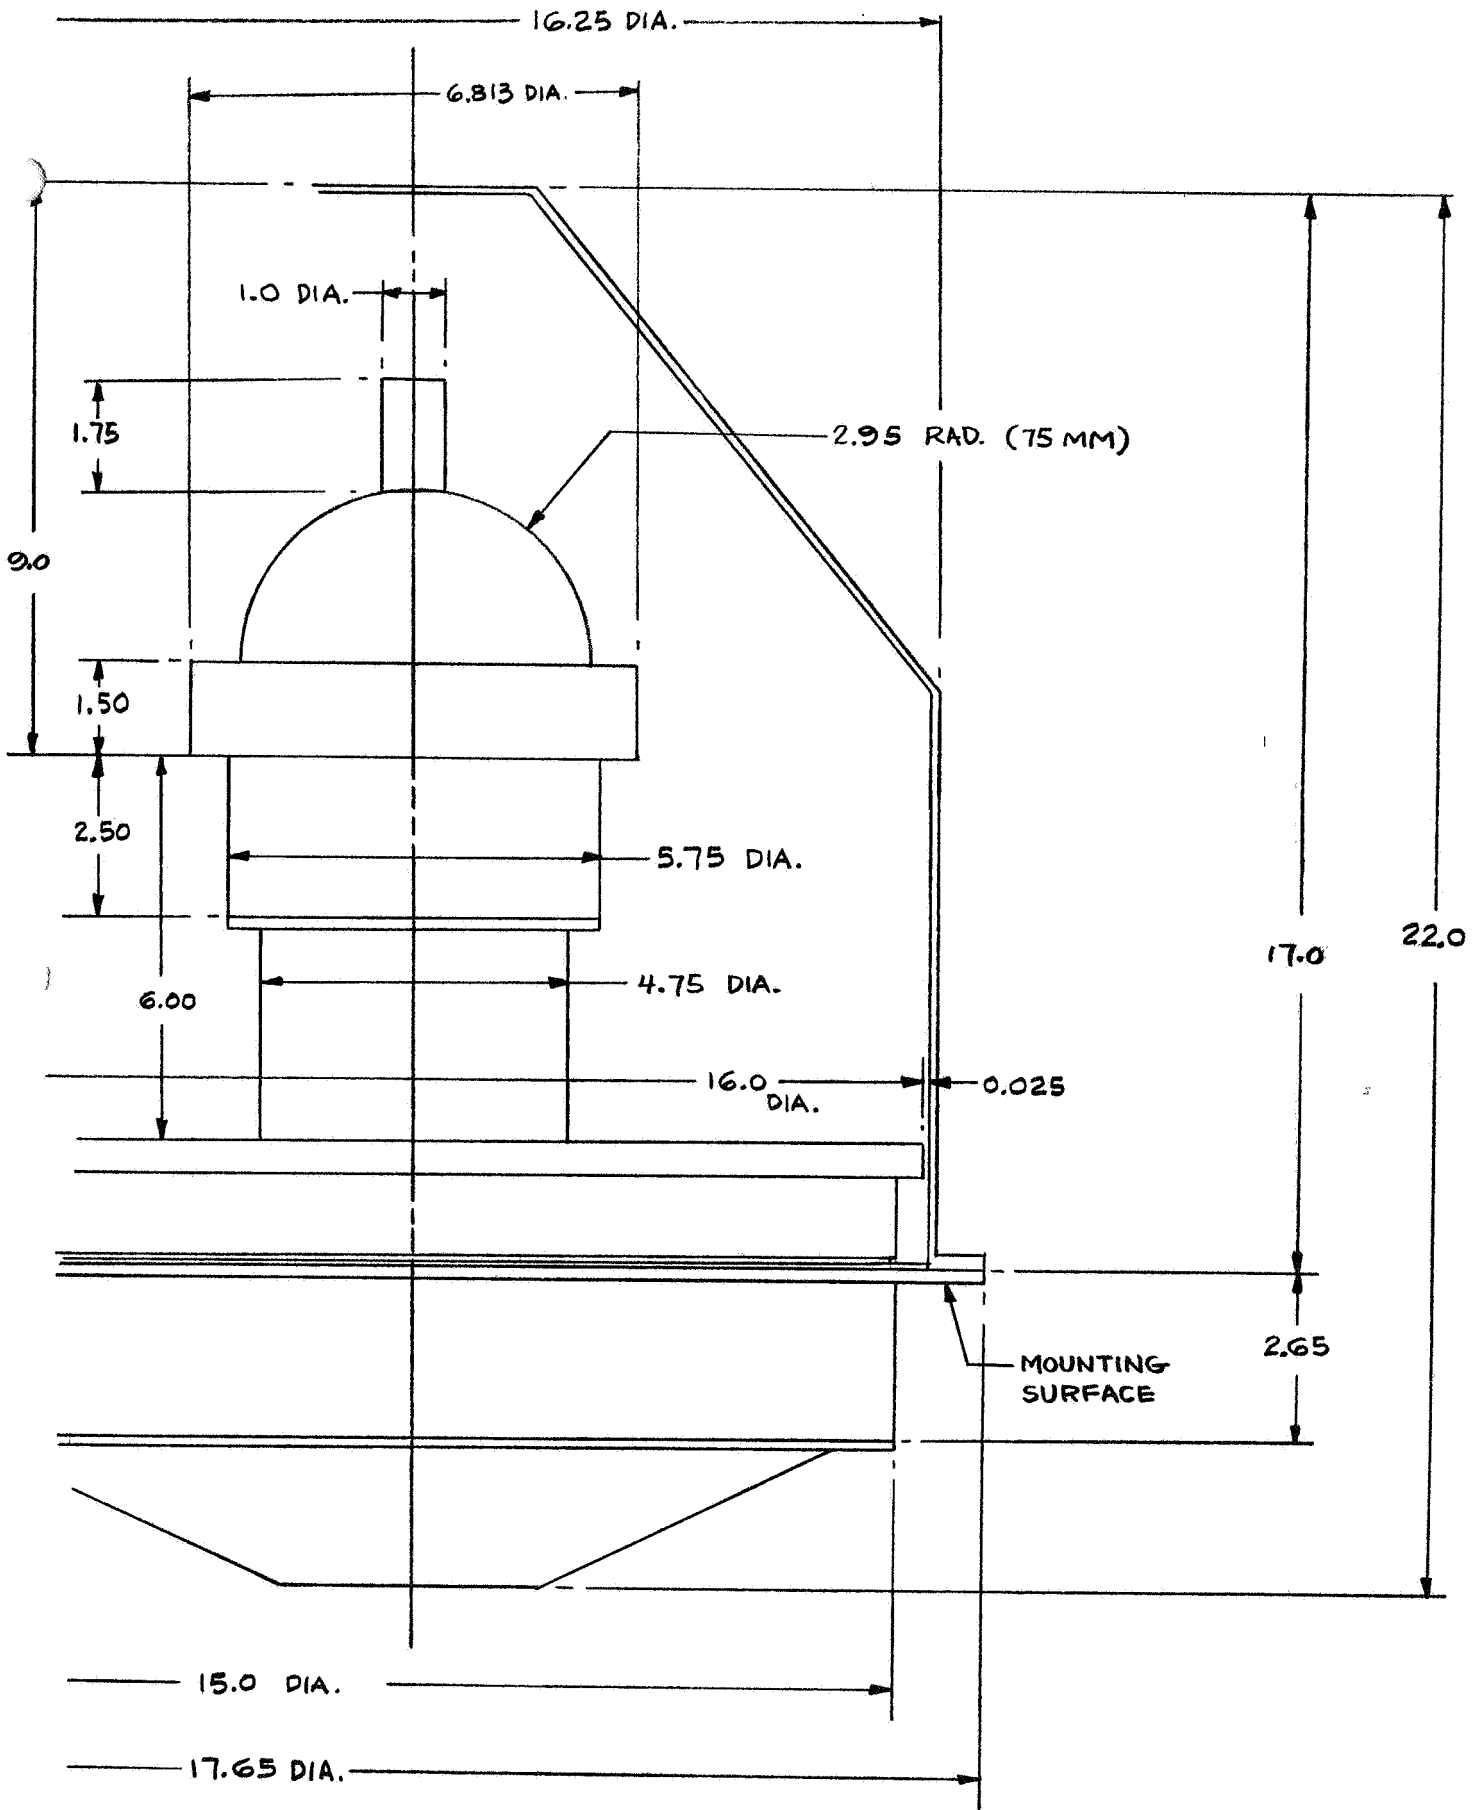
MECHANICAL ASSEMBLY KEY DIMENSIONS (INCHES)
